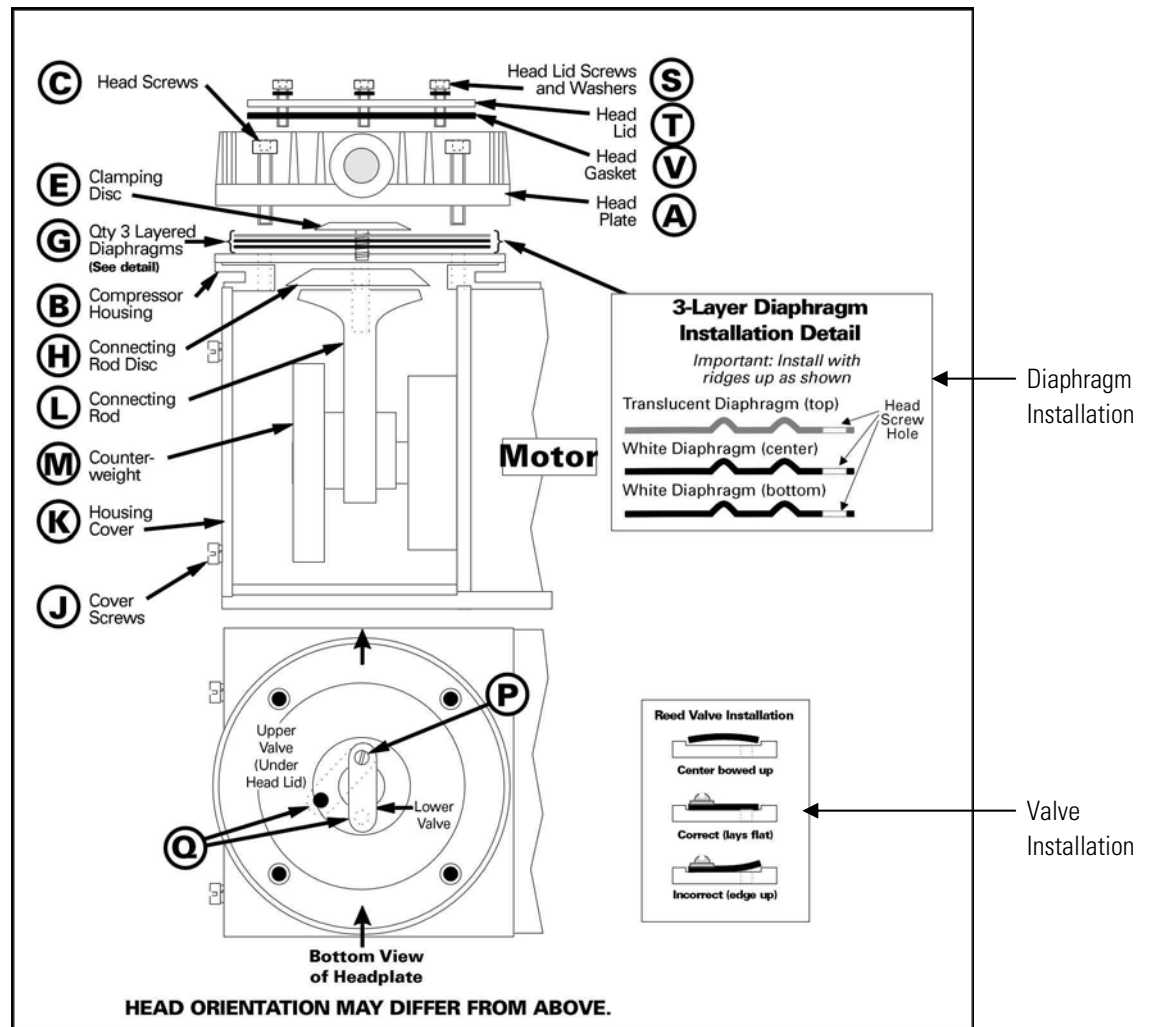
Vacuum Pump – Head Plate and Motor View
